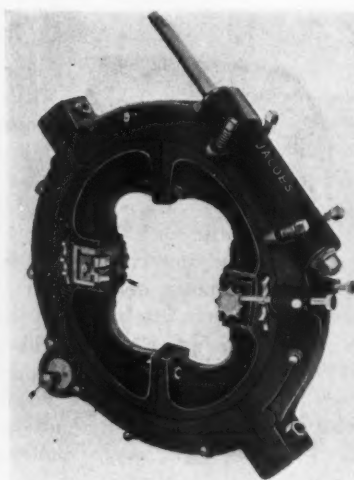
PORTABLE RE-TURNING MACHINE FOR INSIDE CRANKS.
